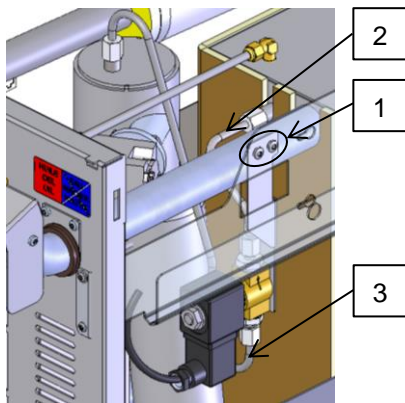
Attach mounting bracket with solenoid valve (YV 1)
